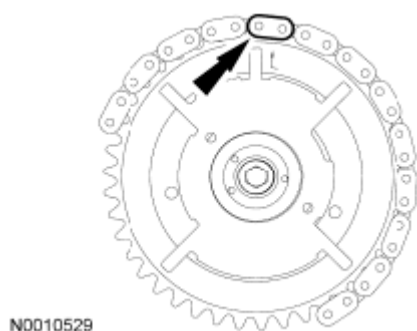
Locating LH Timing Chain On Camshaft Sprocket
